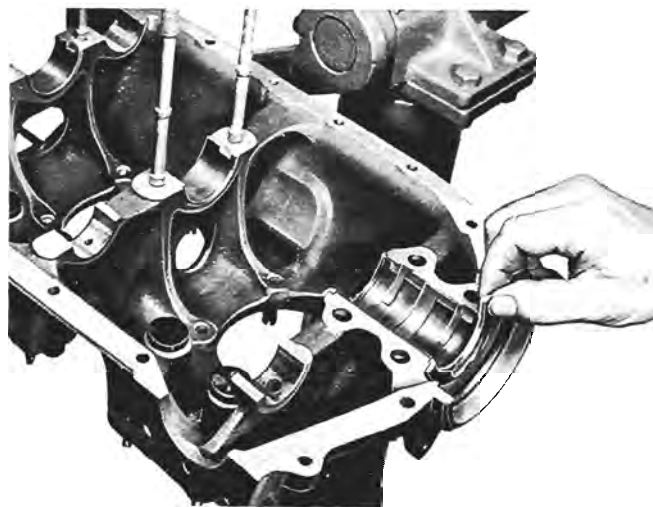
Installing Crankshaft Bearing and Old Type Thrust Washer.
